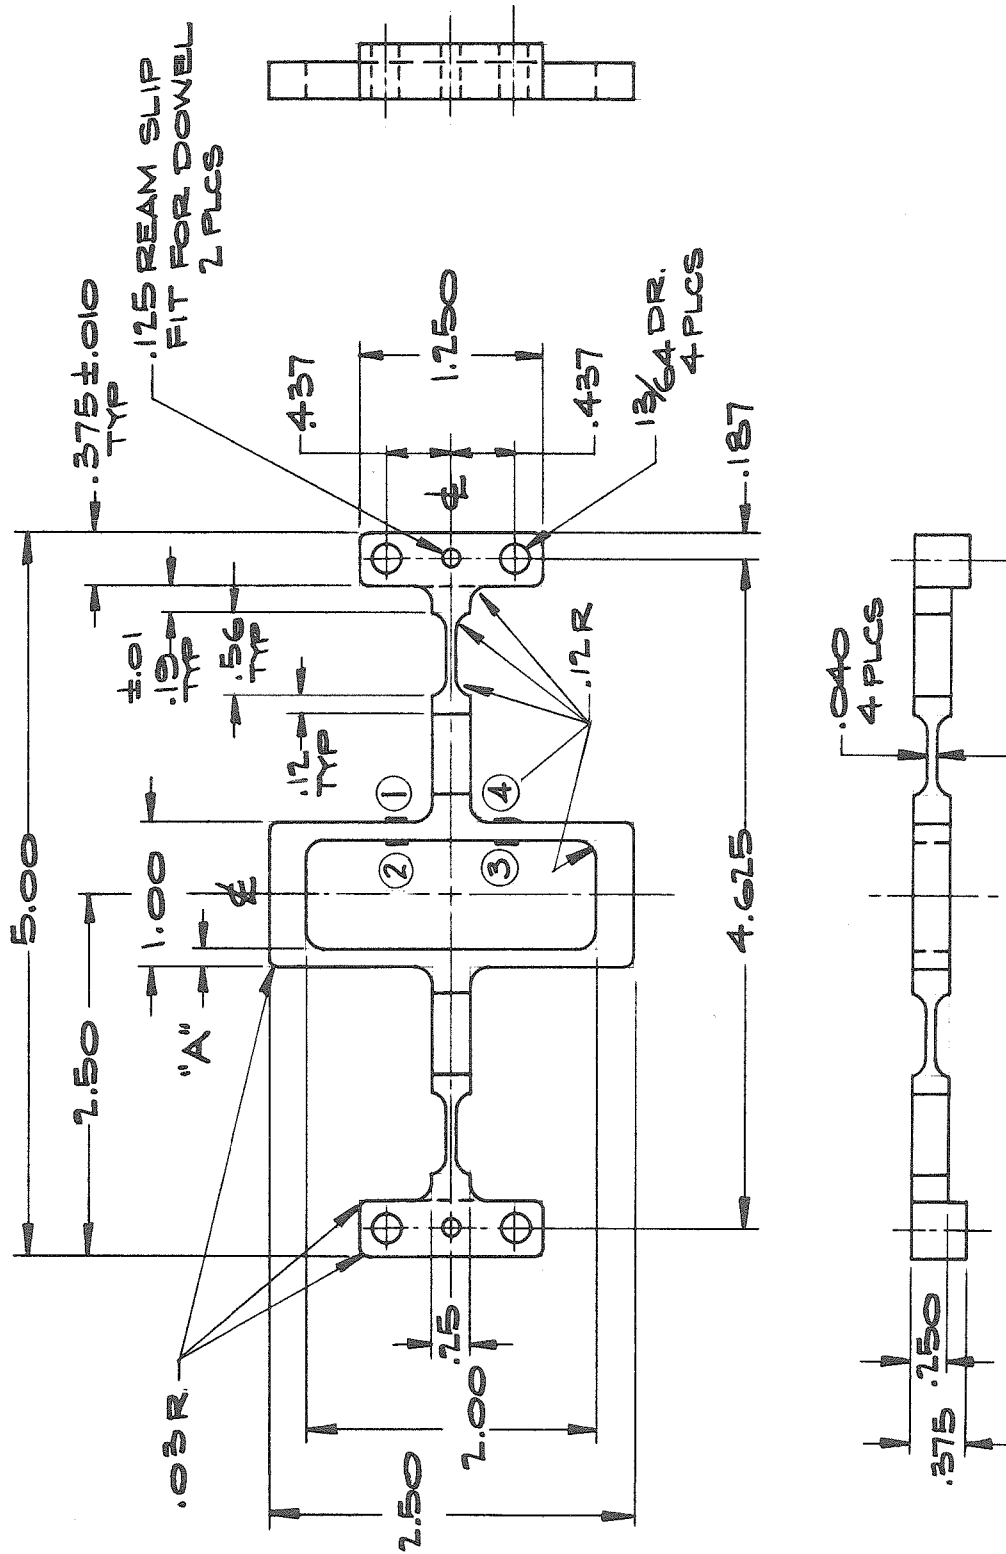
Machine drawing of the External Balance load cell elements. 1, 2, 3 and 4 show positions where strain gauges were mounted.
